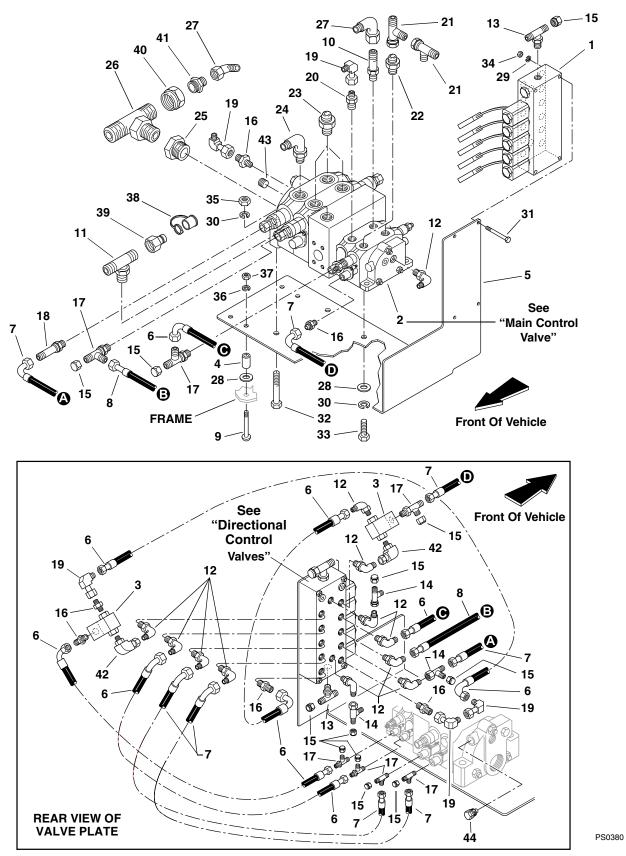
Main control valve plate assembly (without auxiliary hydraulics).
